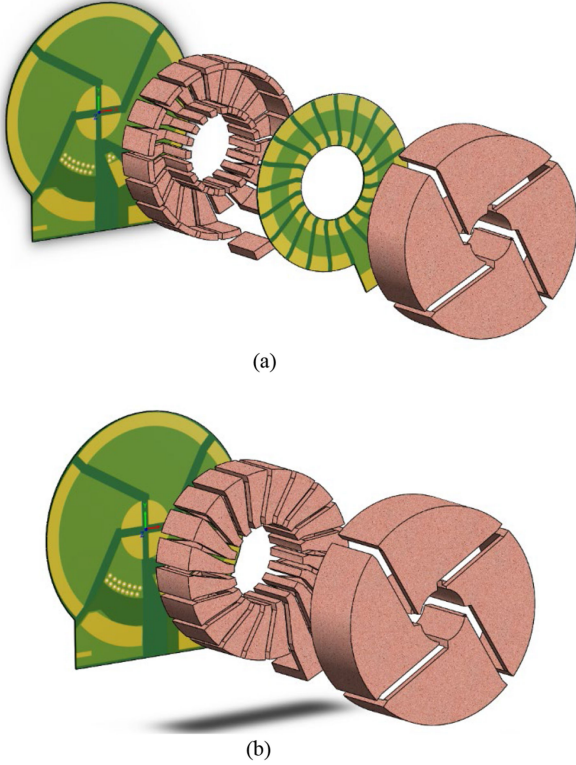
Two manufacturing methods of nested toroidal air core transformer. (a) One side of the inner winding and outer winding is printed with PCB, and the remaining parts are printed with 3-D copper or copper casting. (b) One side of the outer winding is printed with PCB, and the remaining parts are printed with 3-D copper or copper casting.
